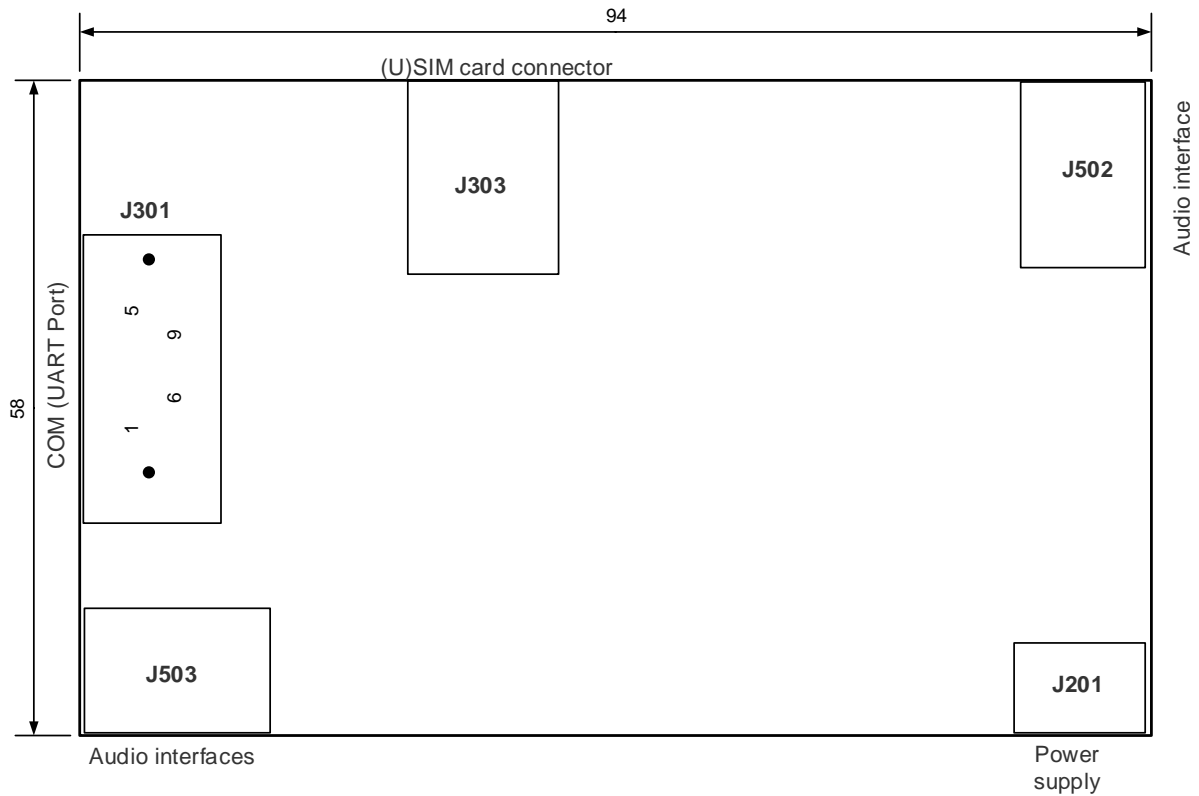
Component Placement of EVB Bottom Side (Unit: mm)
